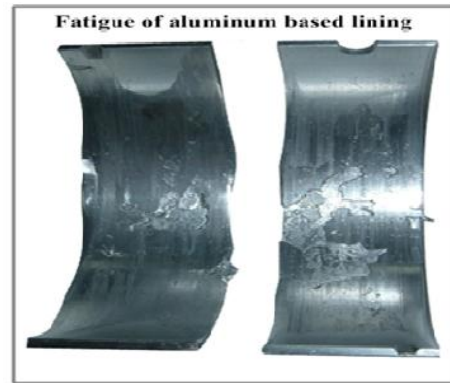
Fatigue of aluminium lining of bi-metal bearings
